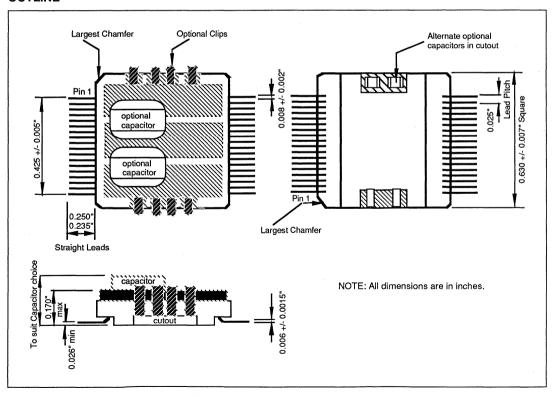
36 Lead Ceramic Flatpack (Solder Seal) - Package Style F
